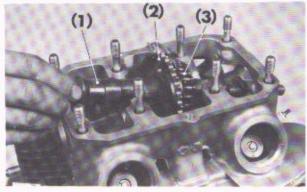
(1) Camshaft (2) Sprocket (3) Cam chain
